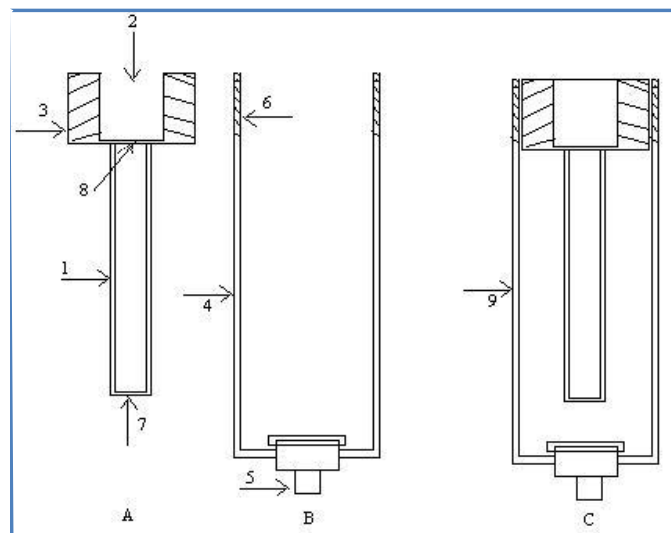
(A) Acting element, (B) Outer casing and (C) Complete transducer assembly
